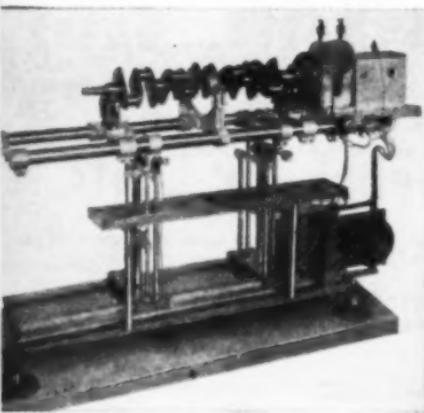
Another type of pivoted frame dynamic balancing machine.
